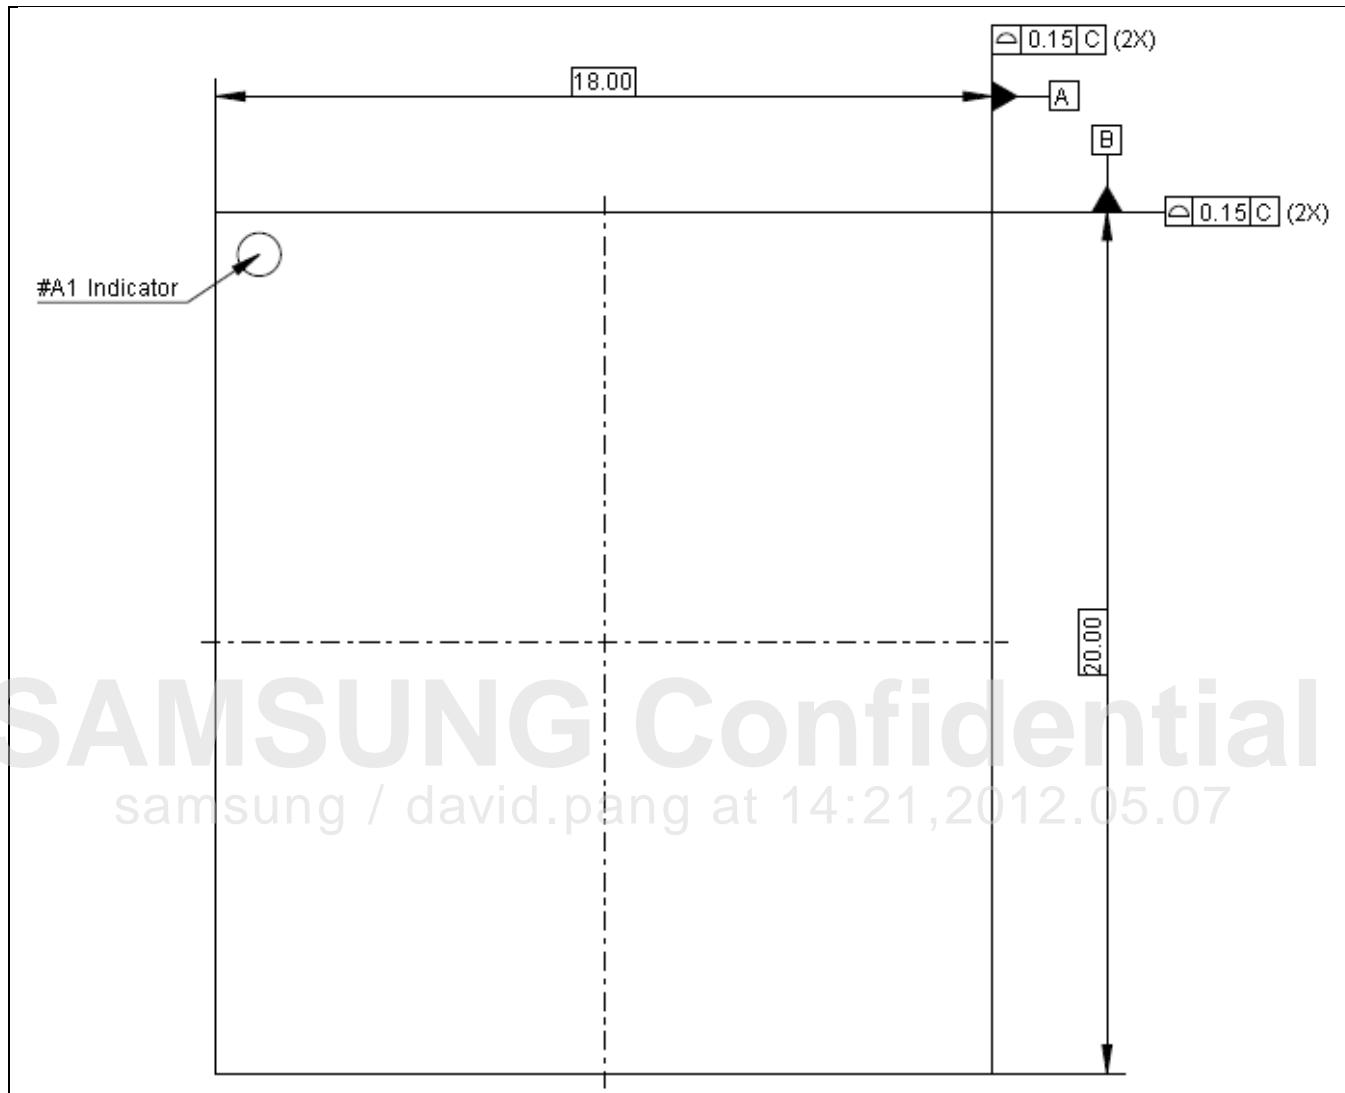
Exynos 4412 SCP Package Dimension (804-FCMSP) Top View
